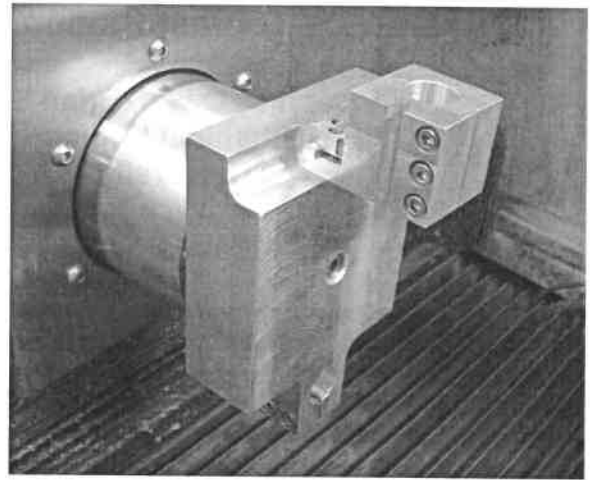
View of the toolset station with the rotating probe clamp set to measure the tool height
